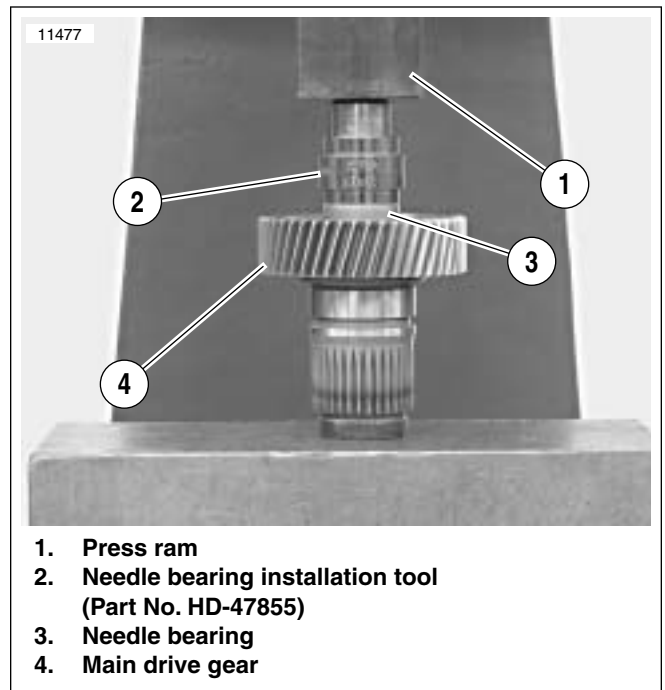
Pressing Inner Needle Bearing Assembly into Main Drive Gear
